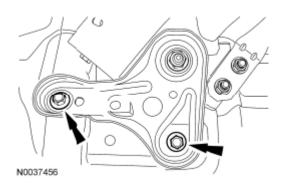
Locating Subframe Nut Courtesy of FORD MOTOR CO.
